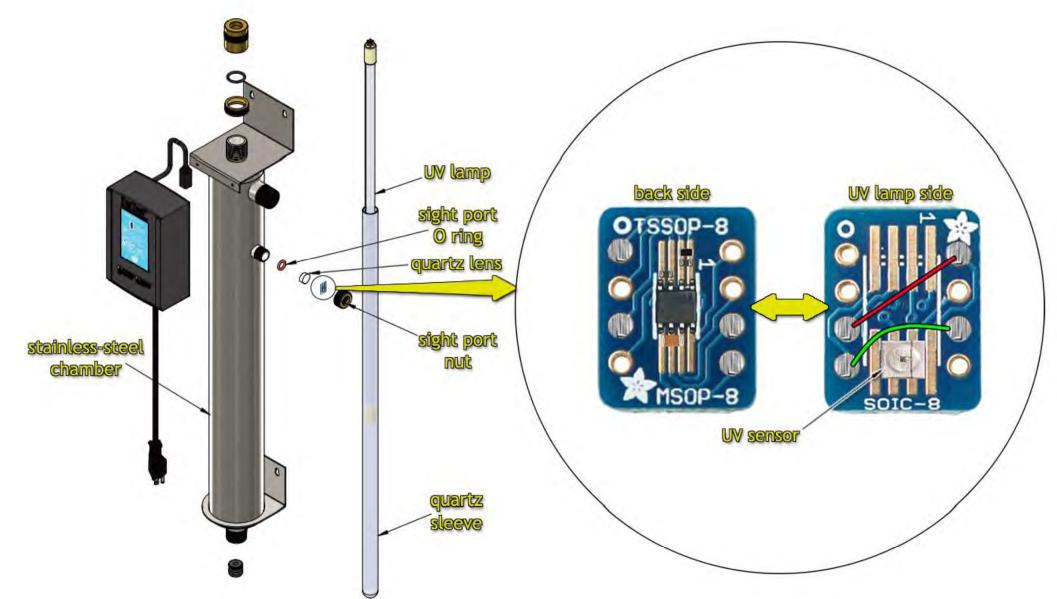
Exploded view drawing that shows the existing sight port being repurposed, with a new quartz lens and surface-mount UV sensor circuit inserted into the existing UV disinfection system.
